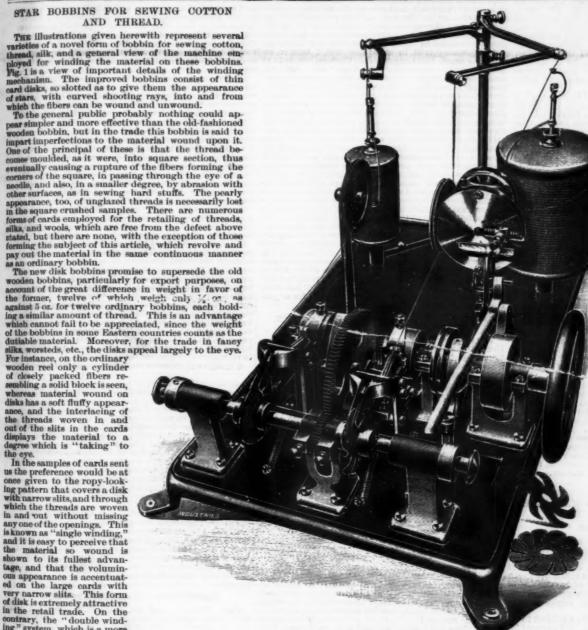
MACHINE FOR WINDING STAR BOBBINS.
